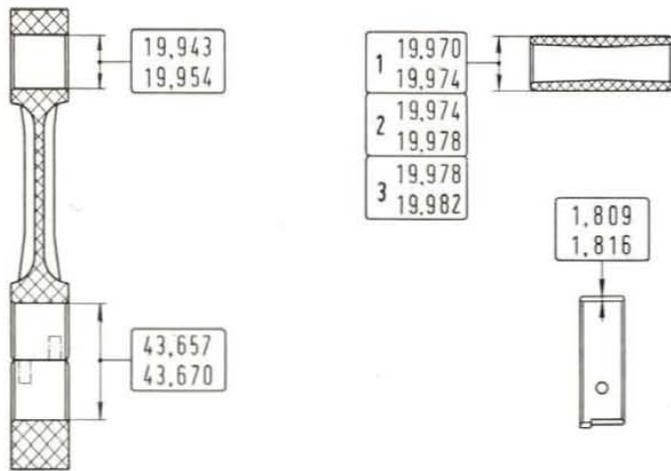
Critical dimensions (metric) of connecting rod, rod bearing insert and piston pin. (Early type)
